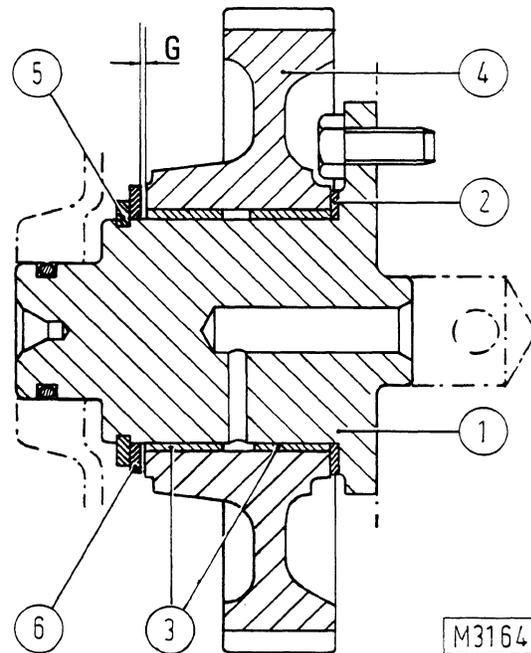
Section view of driven idle gear assy. $G = 0,05-0,308$ mm (0,00196-0,01212 in): clearance between gear and thrust ring to be checked when assembled - 1. Hub - 2. Thrust ring - 3. Bushings - 4. Idler gear - 5. Gear (4) retaining clip - 6. Thrust ring.
